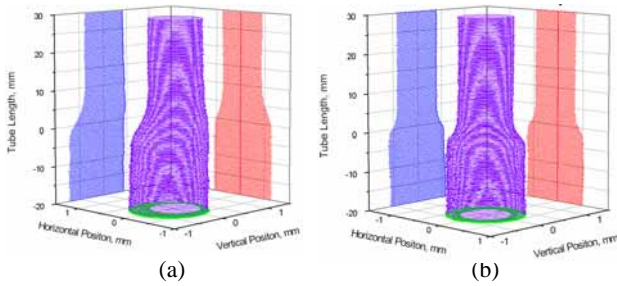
3-D laser profile; typical of (a) explosively and (b) hydraulically expanded mock-up tube.
